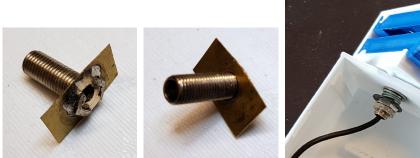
Left: Axis for paddle rotation. The flanged, threaded tube is fabricated from a banana jack and a piece of brass foil. Right: Spring loaded attachment of the paddle base to the QCX enclosure wall, with cable feedthrough. Note one of the bumps on the paddle wall for snapping the rotation movement in place in the operating or parked positions. See text.
